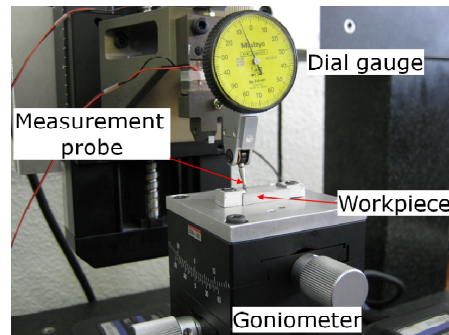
Adjustment of workpiece horizontality using dial gauge
